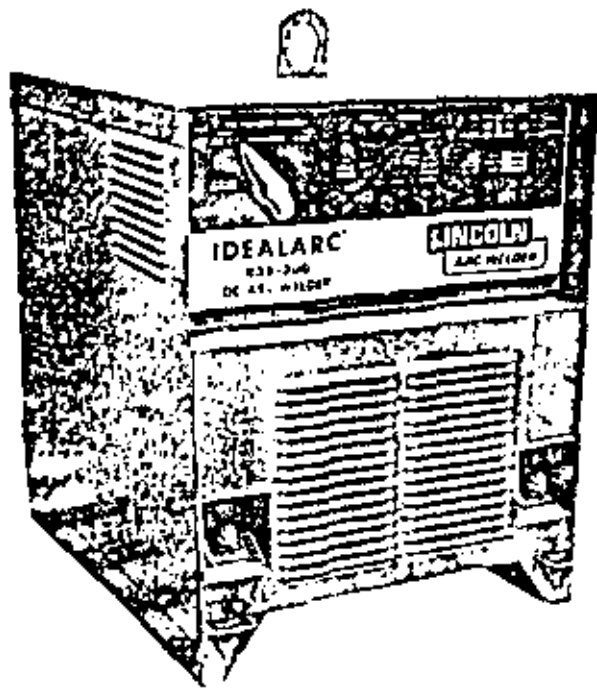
A typical industrial type AC three-phase input, DC output variable voltage welder. The heavy-duty welders are available in a wide range of sizes, see Table 4-36.
